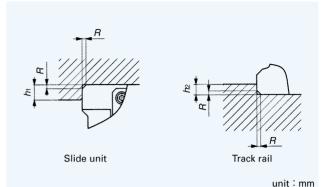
Relieved fillet at the corner of the mating reference mounting surfaces
